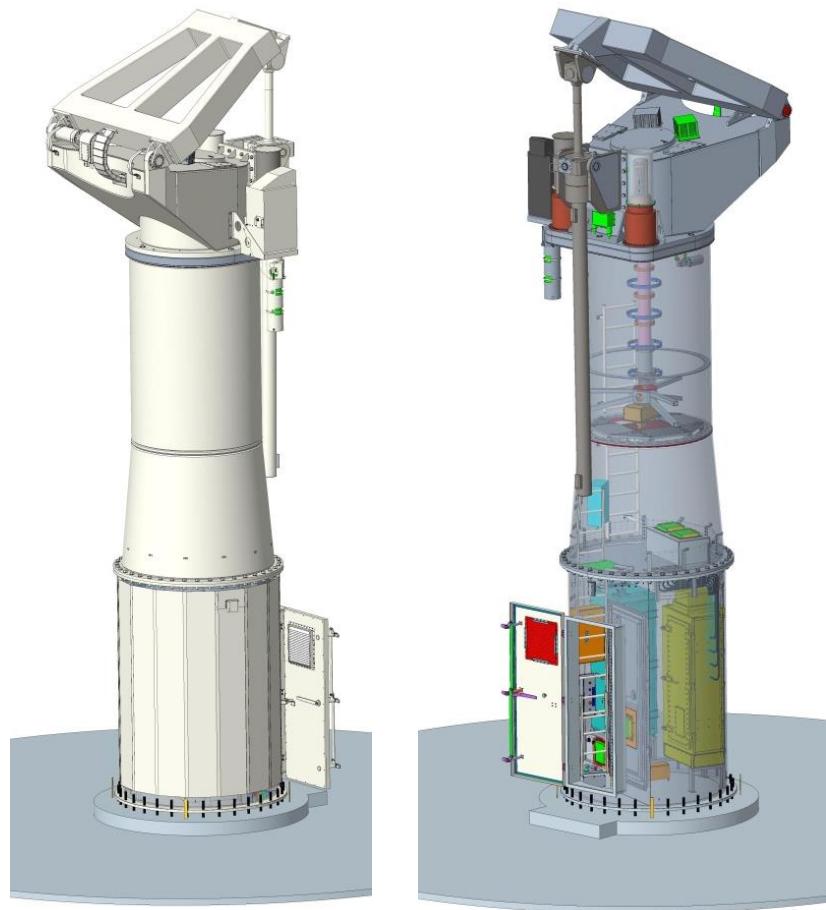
Pedestal and Turnhead Assembly 3D Drawing
